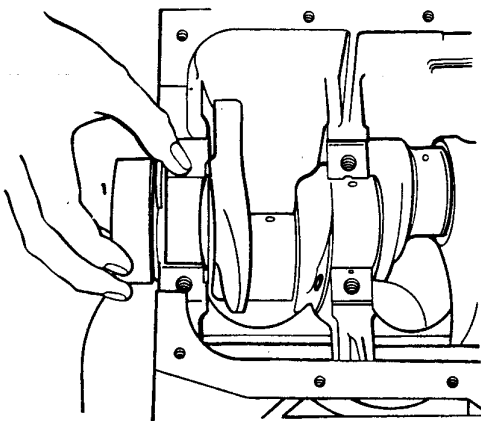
Installing Thrust Half-Rings on Rear Support
